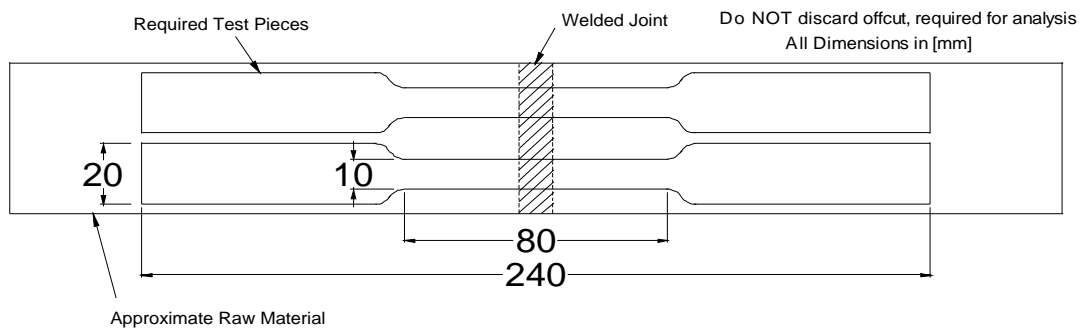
SSRT samples dimensions. All dimensions are in millimeters.
